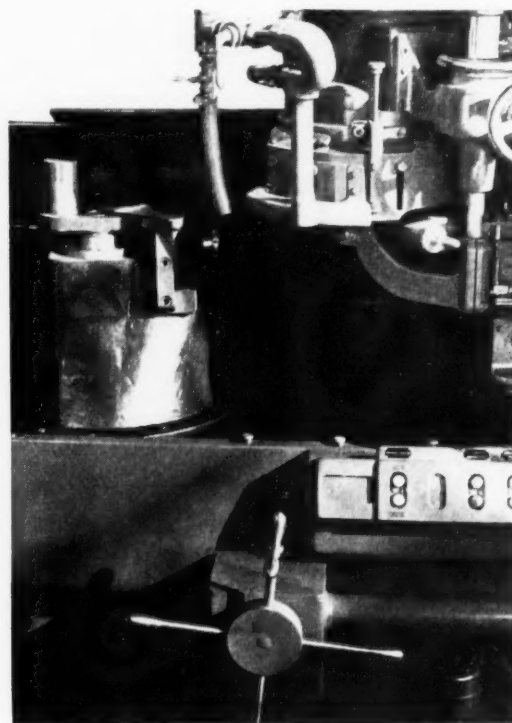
Close-up View of Fixture and Work Shown in Fig. 1
